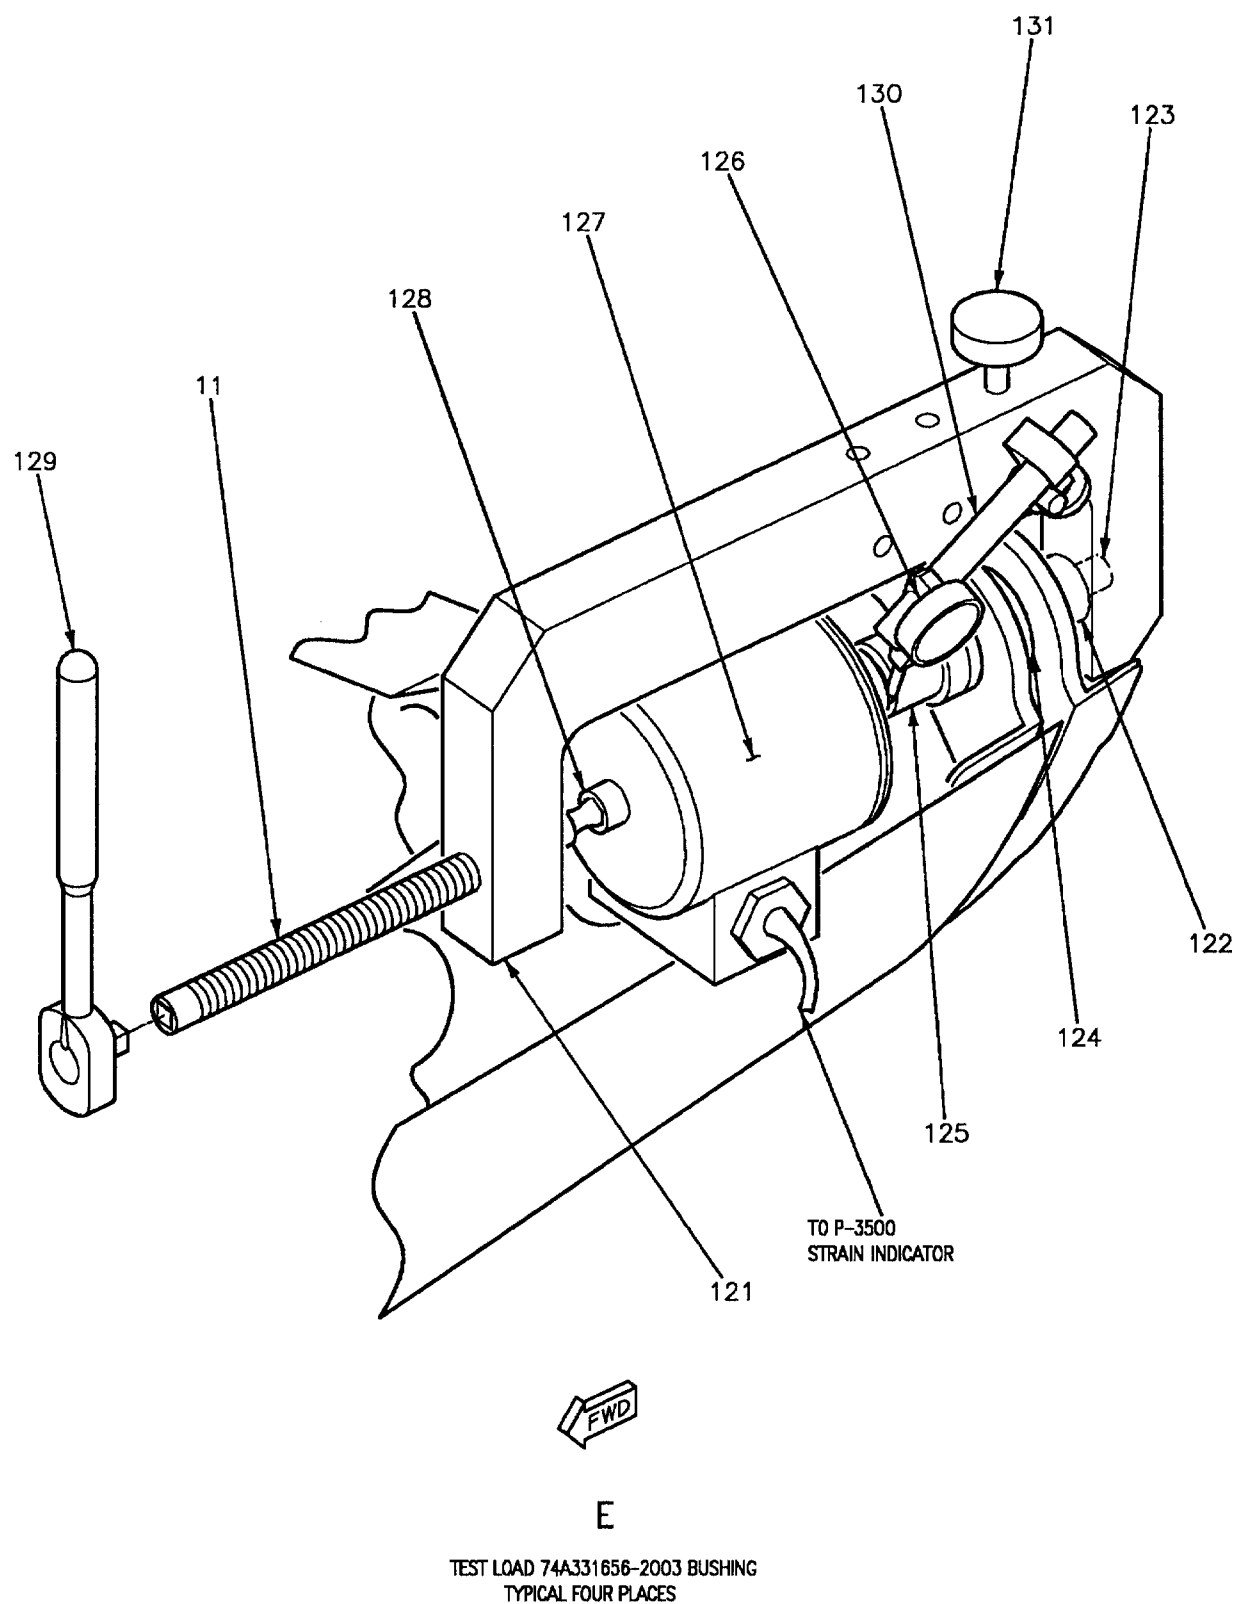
Bushing Removal, Installation, Drilling And Reaming (Sheet 3)
